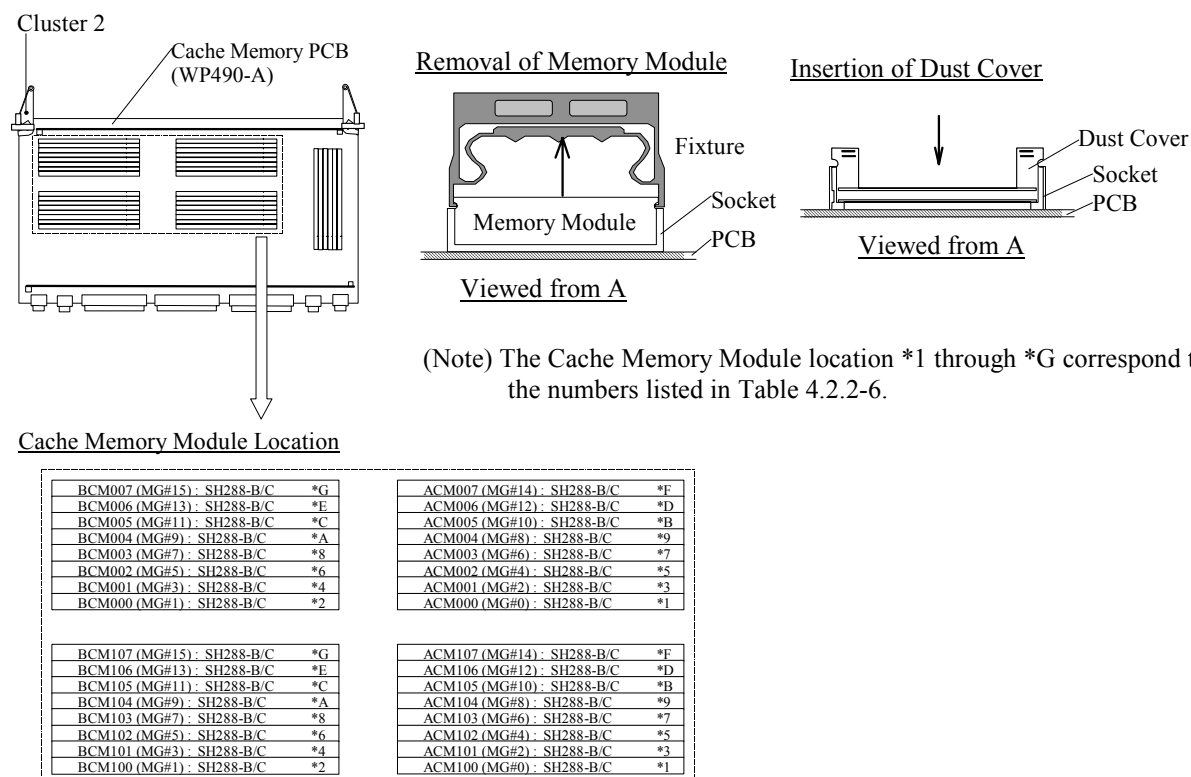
Removal of the Cache Memory PCB
